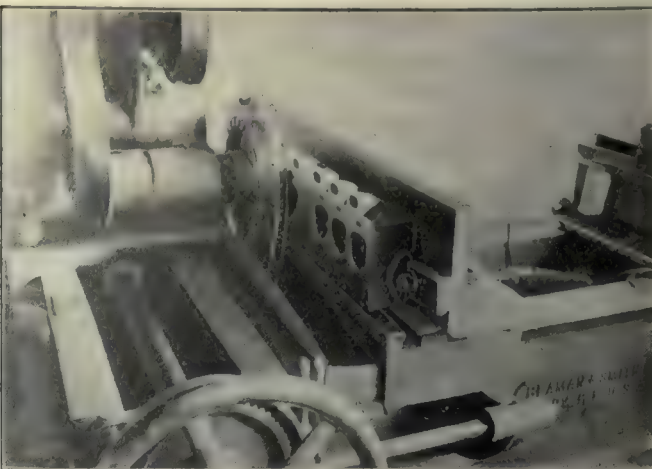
MILLING LOWER SIDE OF CYLINDER HEAD
